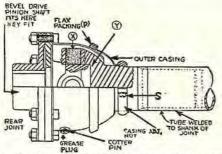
This is the rear universal joint which is connected to the rear end of the drive shaft at the right end of the joint, and to the bevel-pinion drive shaft at the left end. Note that the splines are not used in this rear joint.
